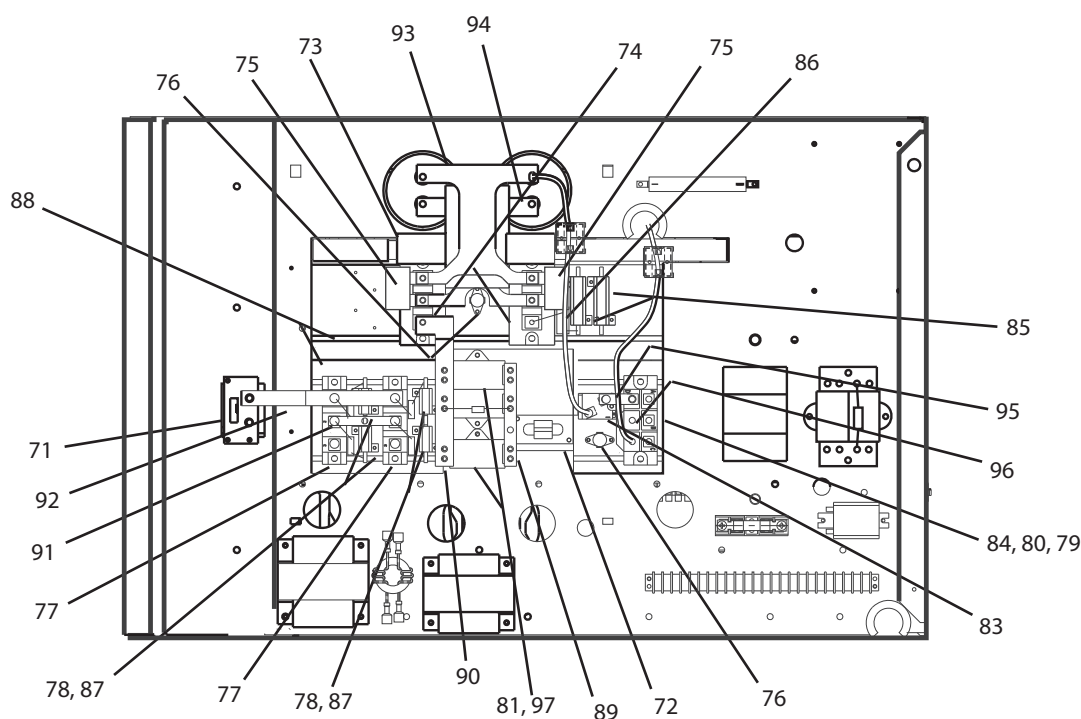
ESP-100i Top View (PCB1 Removed)
